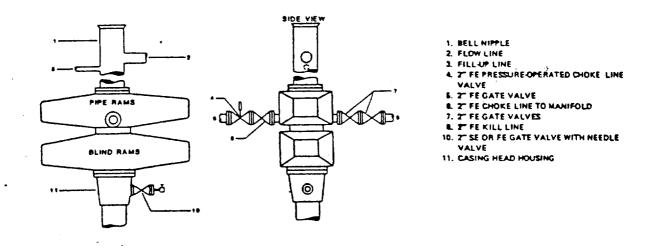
Standard Hydraulic Blowout Preventer Assembly (2 M or 3 M Working Pressure) Alternative 3 (without Drilling Spool)
